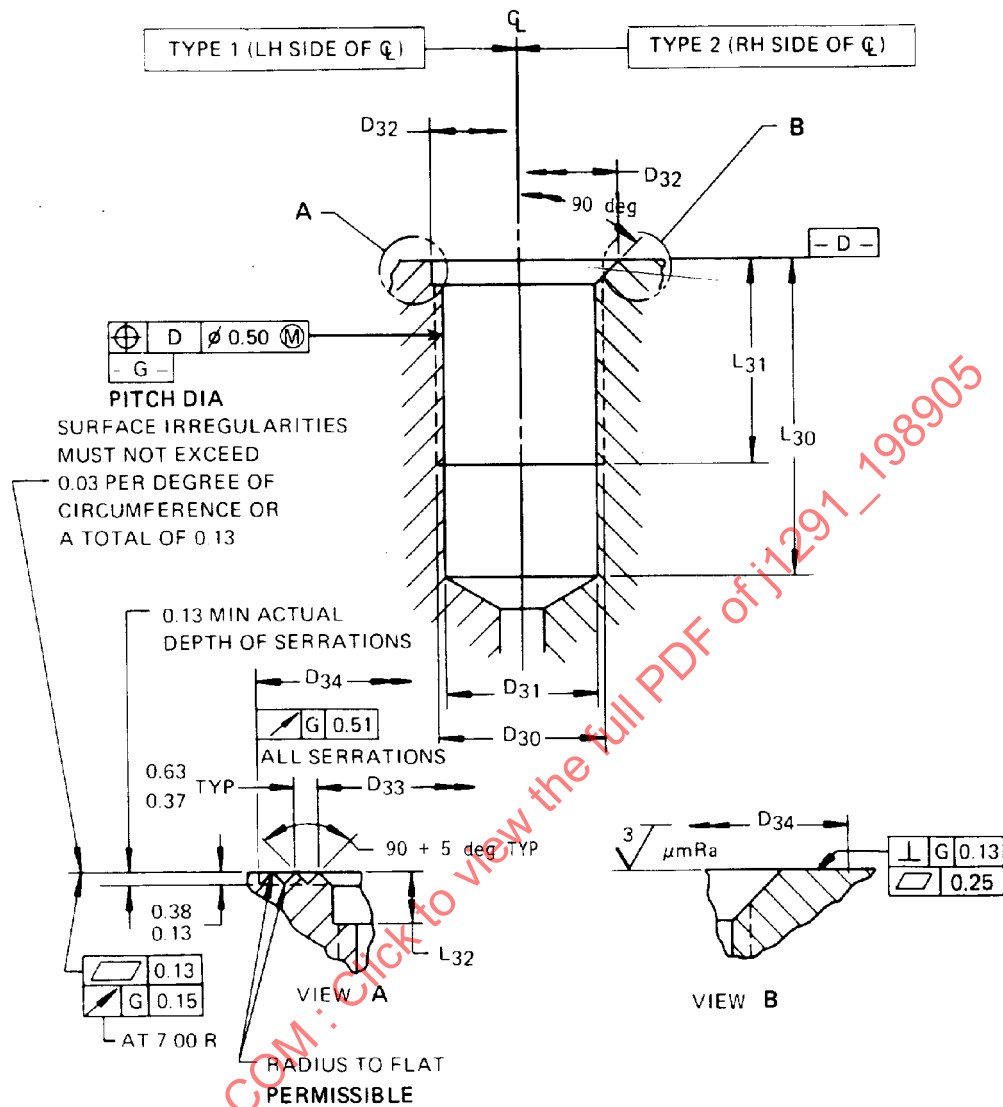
THREADED PORTS FOR BANJO BOLTS (mm)
